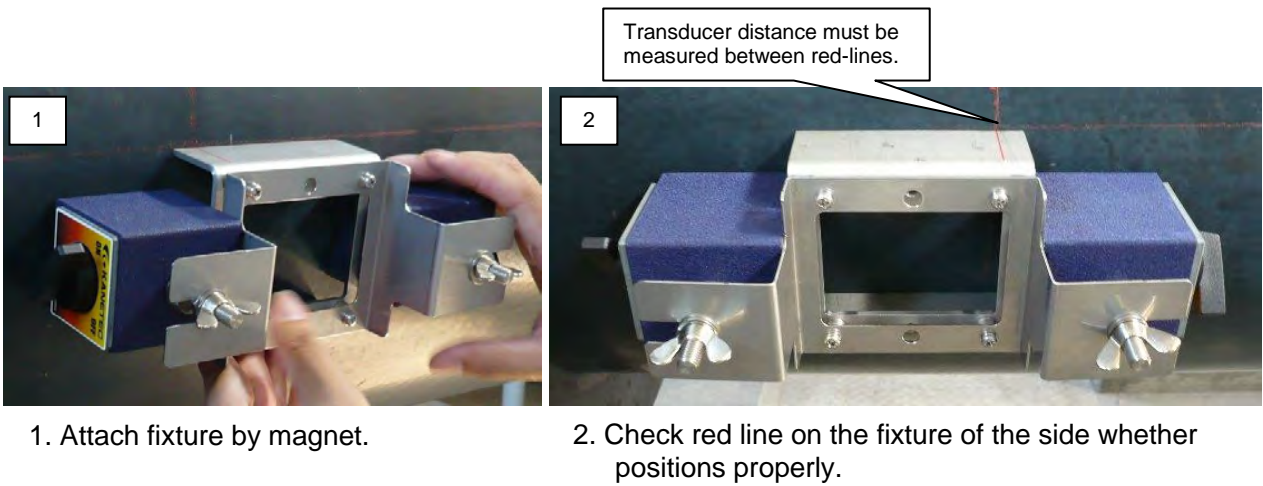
Set the mounting fixture with the magnets
